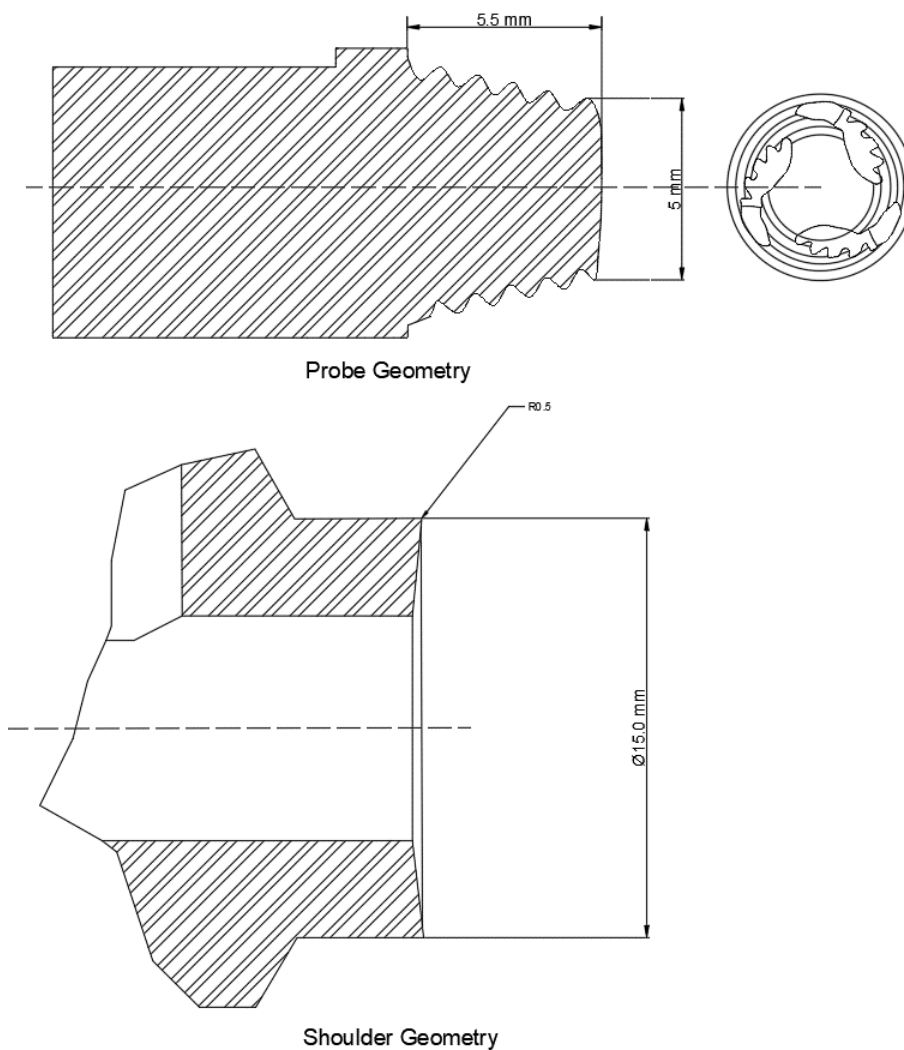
Schematic for two-part FSW tool with probe and shoulder geometry [117], [118]
